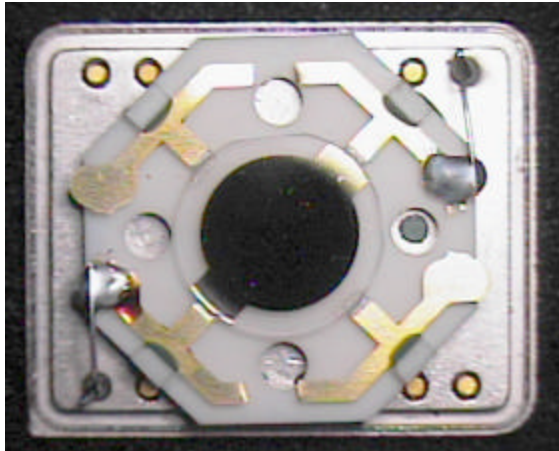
(10mm) Resistance Weld QSM Structure (flats).
